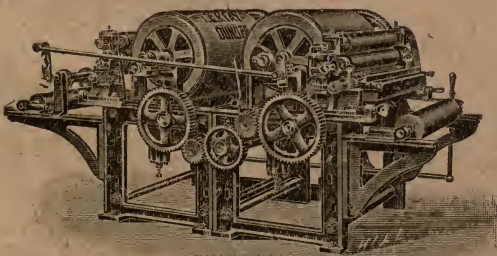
Sack printing machine as made by Messrs. T. C. Keay, Ltd., Dundee.
